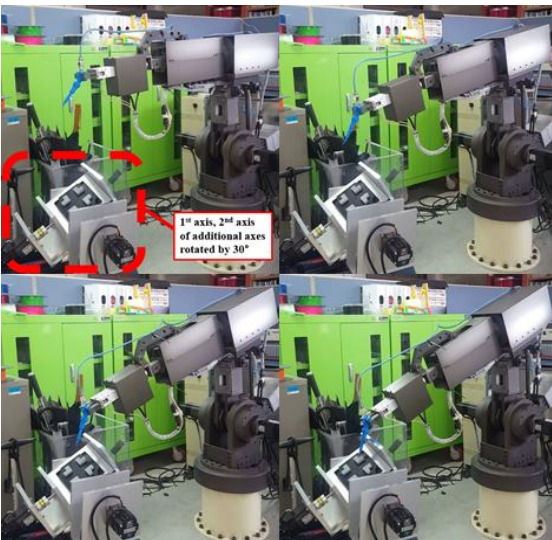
RS2 point1 welding process implementation when 2-axis additional axes work
